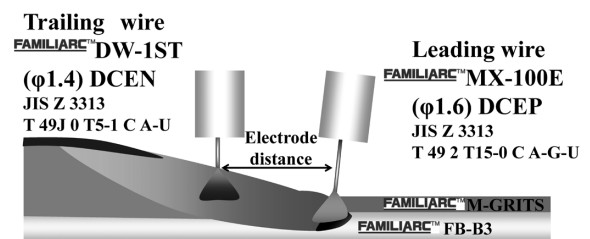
Schematic illustration of one-side tandem MAG welding method
